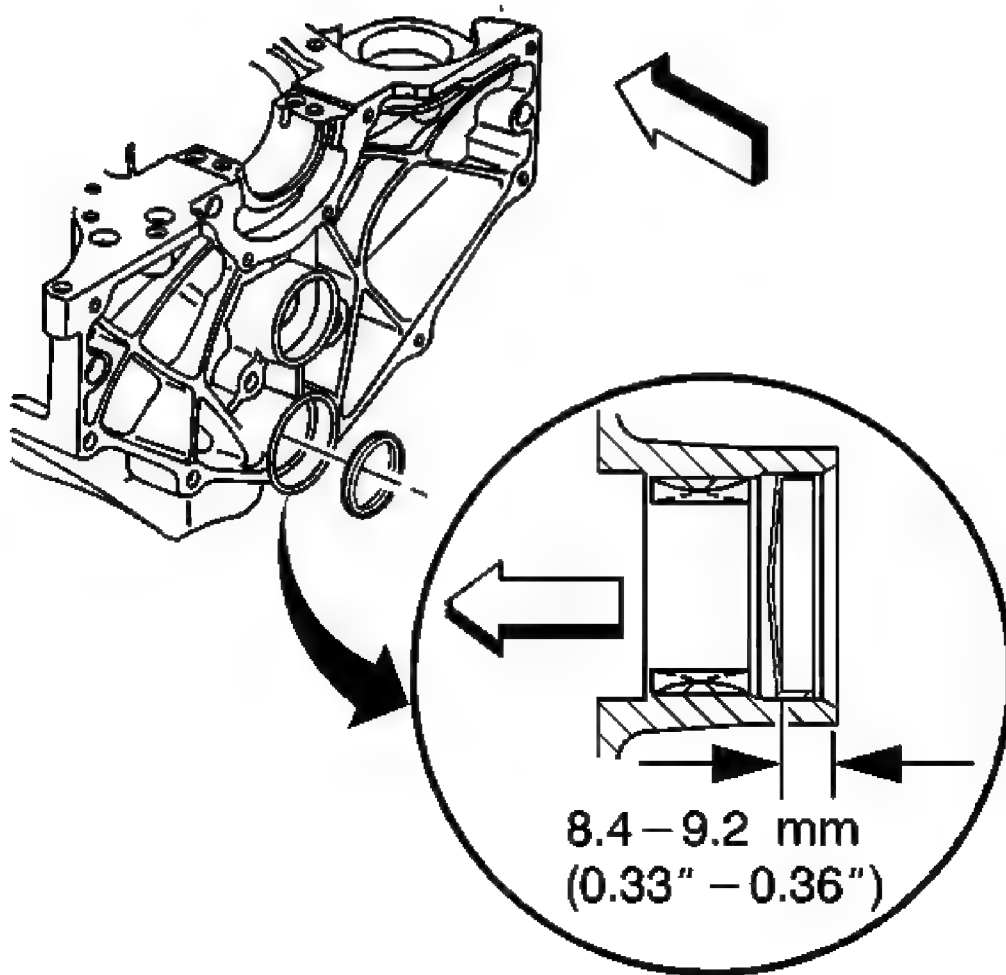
Installing Expansion Cup Plug Into Balance Shaft Rear Bearing Hole
